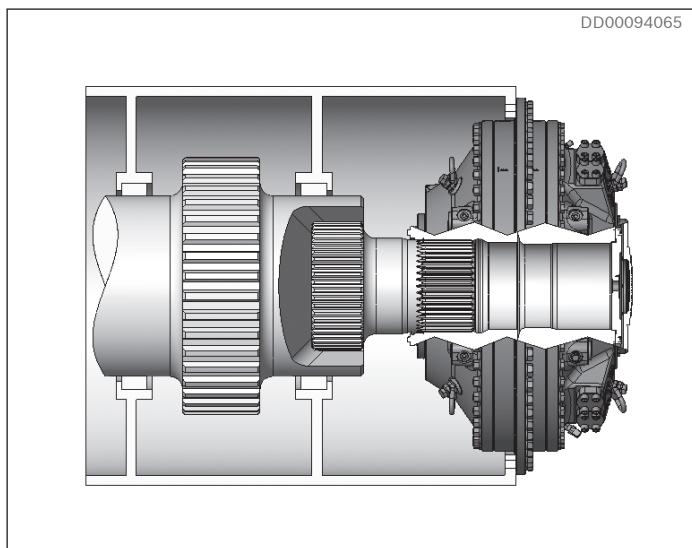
Flange mounted motor with splines and high radial load from driven shaft .
